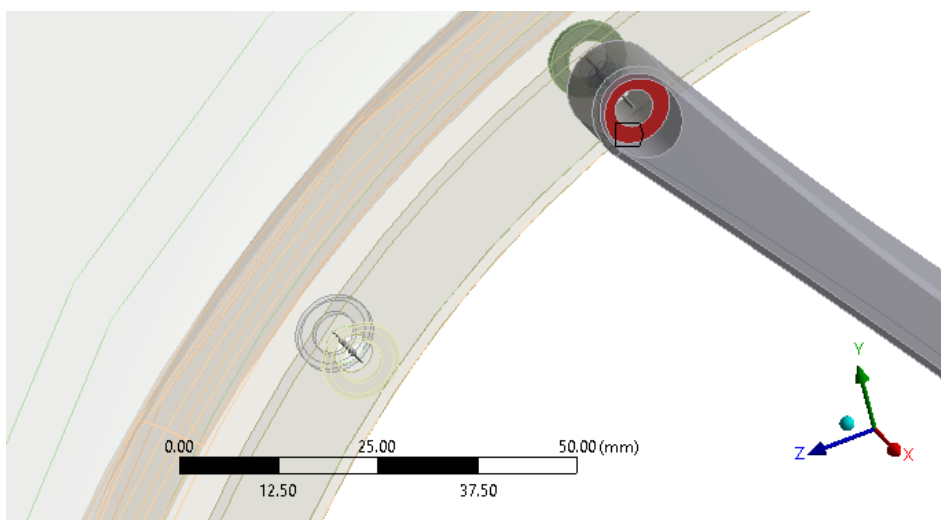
Longitudinal spring joint used to model the bolt clamping force between the wheel centre and inner wheel shell.
